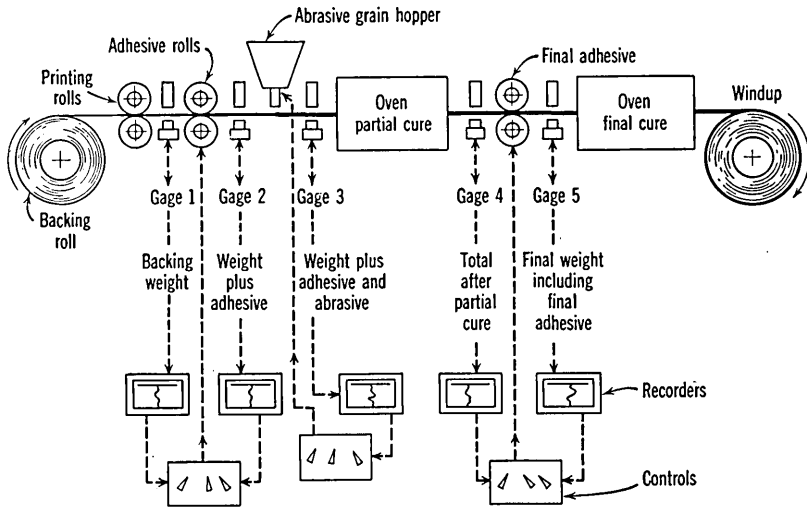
Nuclear gaging system used for coated abrasive processing (Courtesy Industrial Nucleonics Corp.)
